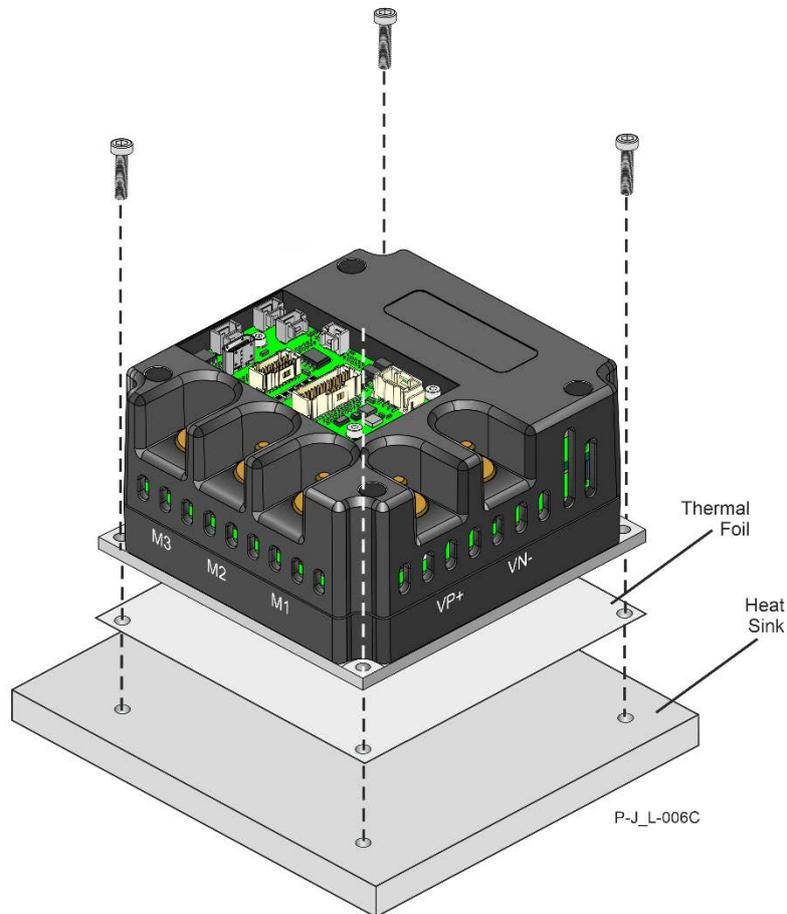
Mount the Heat Sink and Thermal Foil to the Platinum Jori
